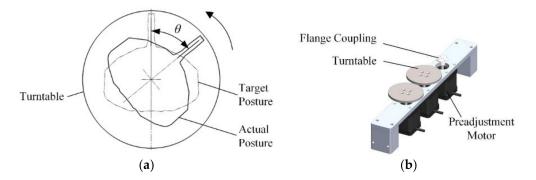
Preadjustment mechanism. (a) Principal diagram of the preadjustment mechanism; (b) 3D view of the preadjustment mechanism.
